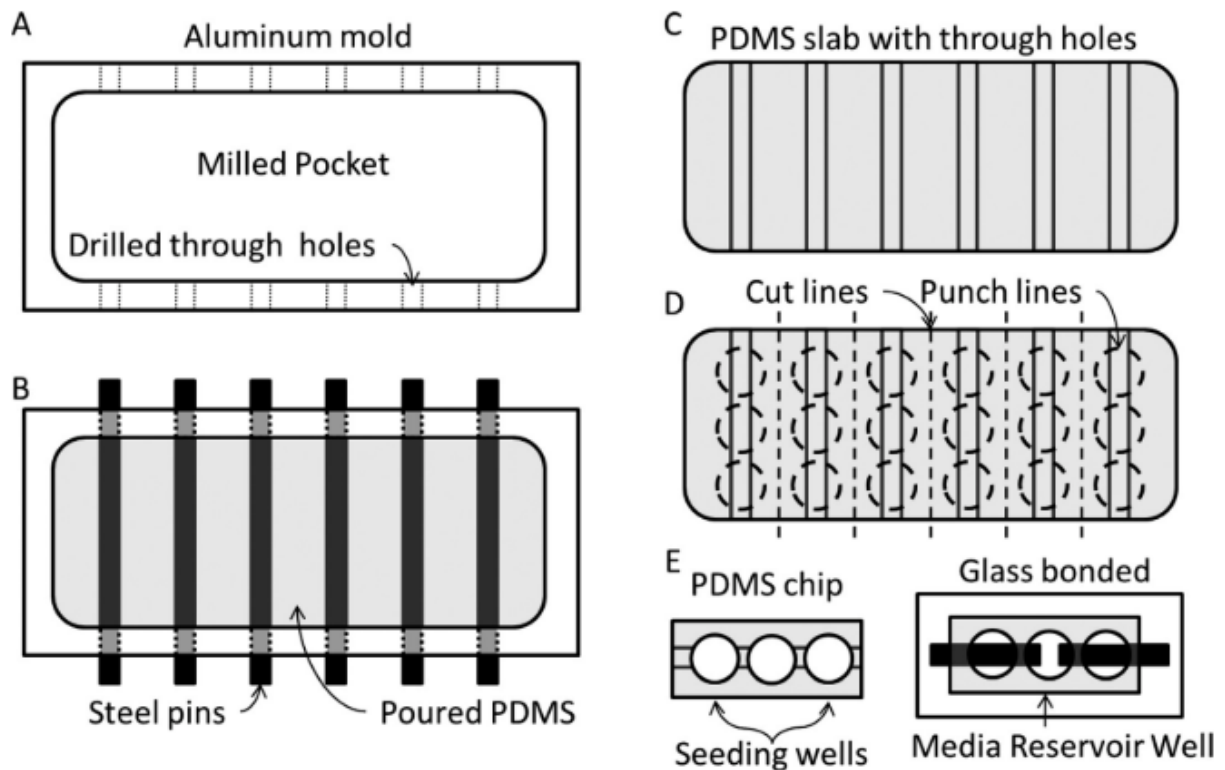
Schematics of the device fabrication. (A) A machined aluminum mold consisting of an aluminum bar with a milled pocket and several drilled through holes. (B) Steel pins spanning the milled pocket with PDMS casted over it, filling the central pocket. (C) PDMS slab after steel pins removal. (D) Cut and punch lines for individual chips. (E) Individual PDMS chip and final device, consisting of PDMS chip bonded to glass with steel pins inserted into the seeding wells. From [116].
